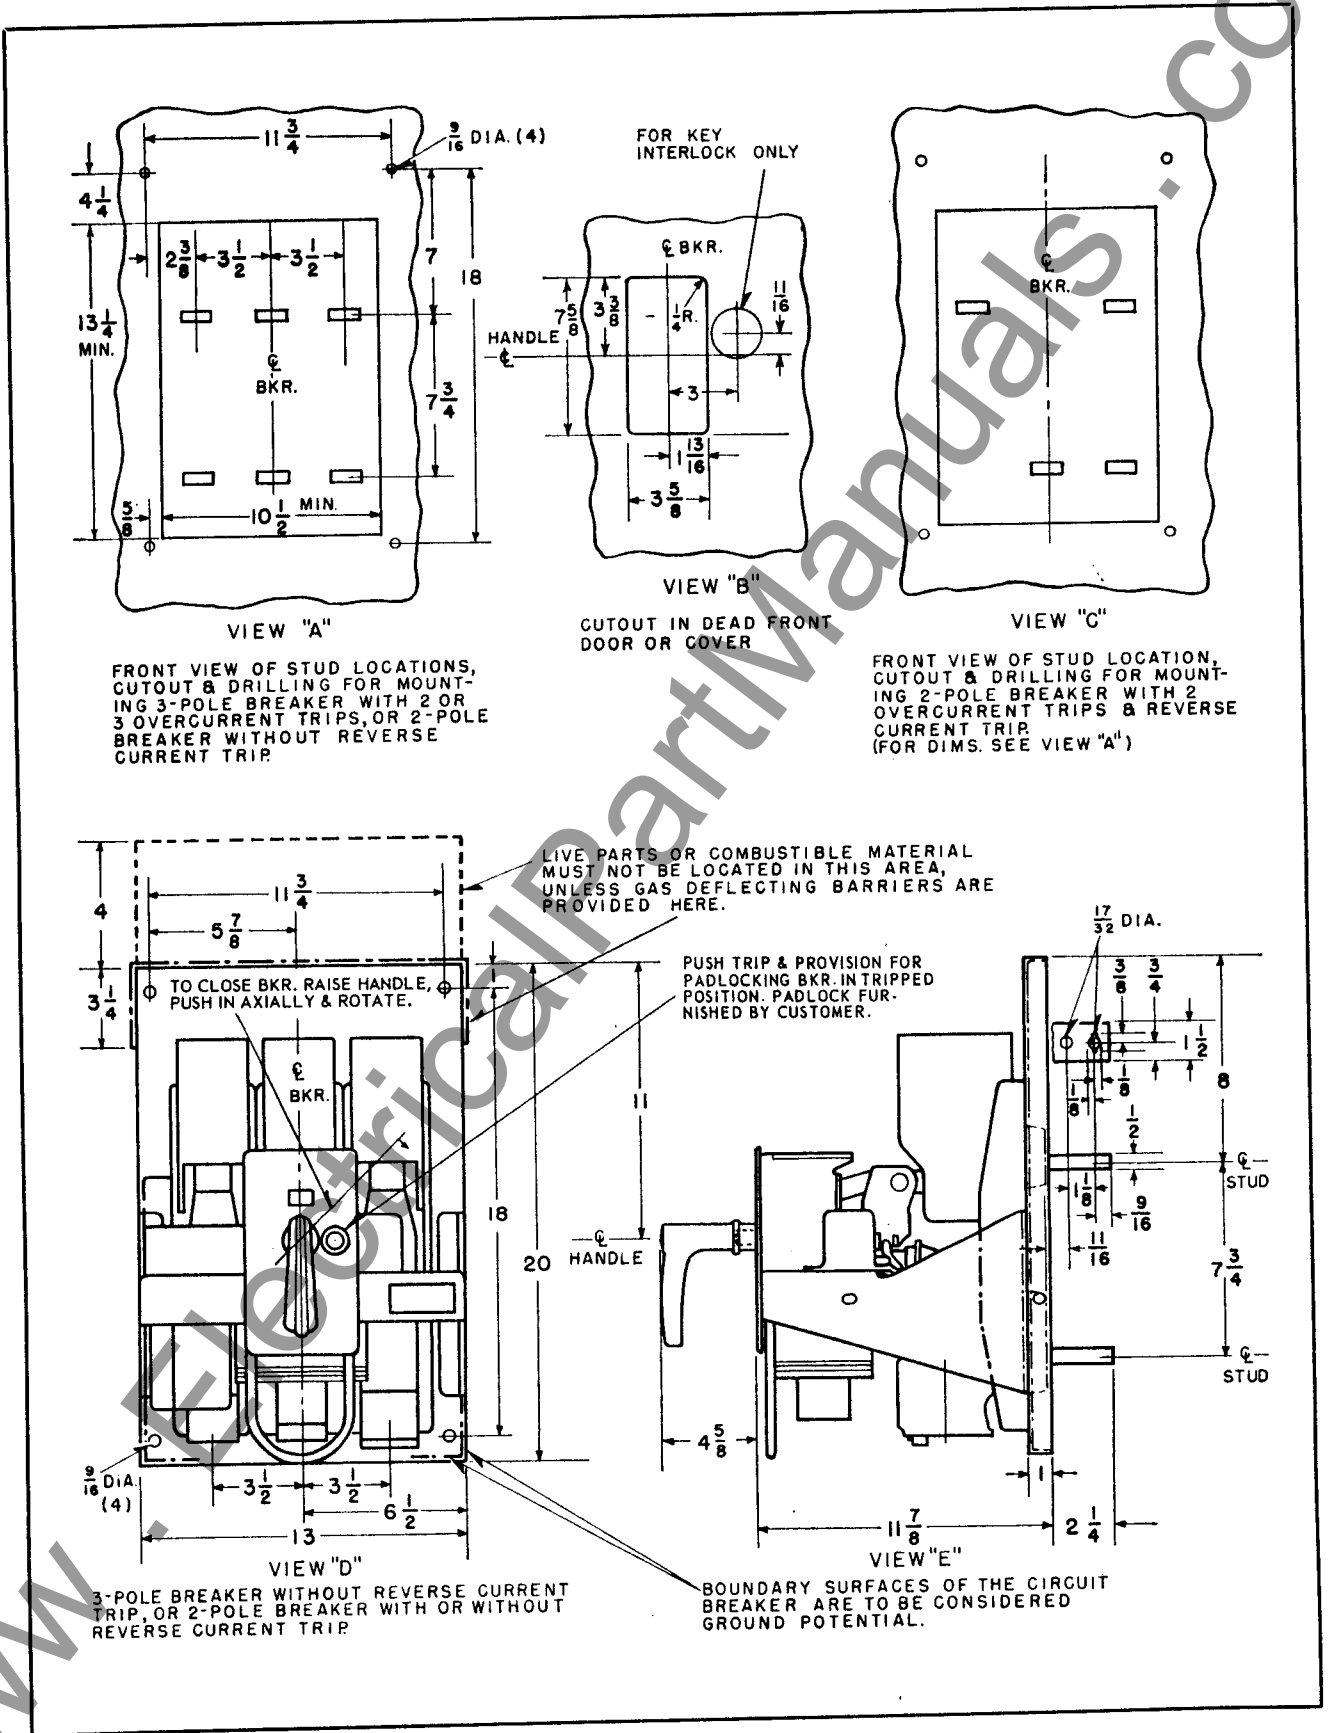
DB-25 Fixed Outline Dimensions and Mounting Details
